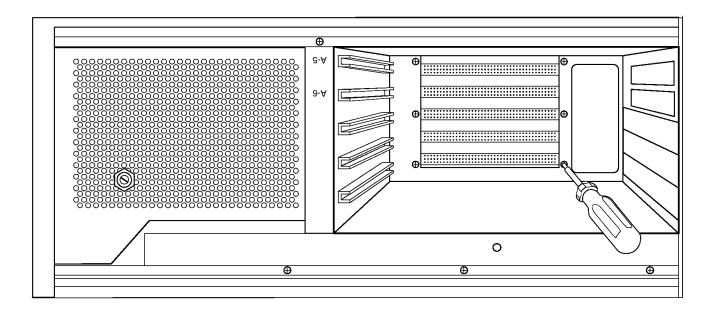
Removing the main interconnect board assembly retaining screws from inside the left card cage
